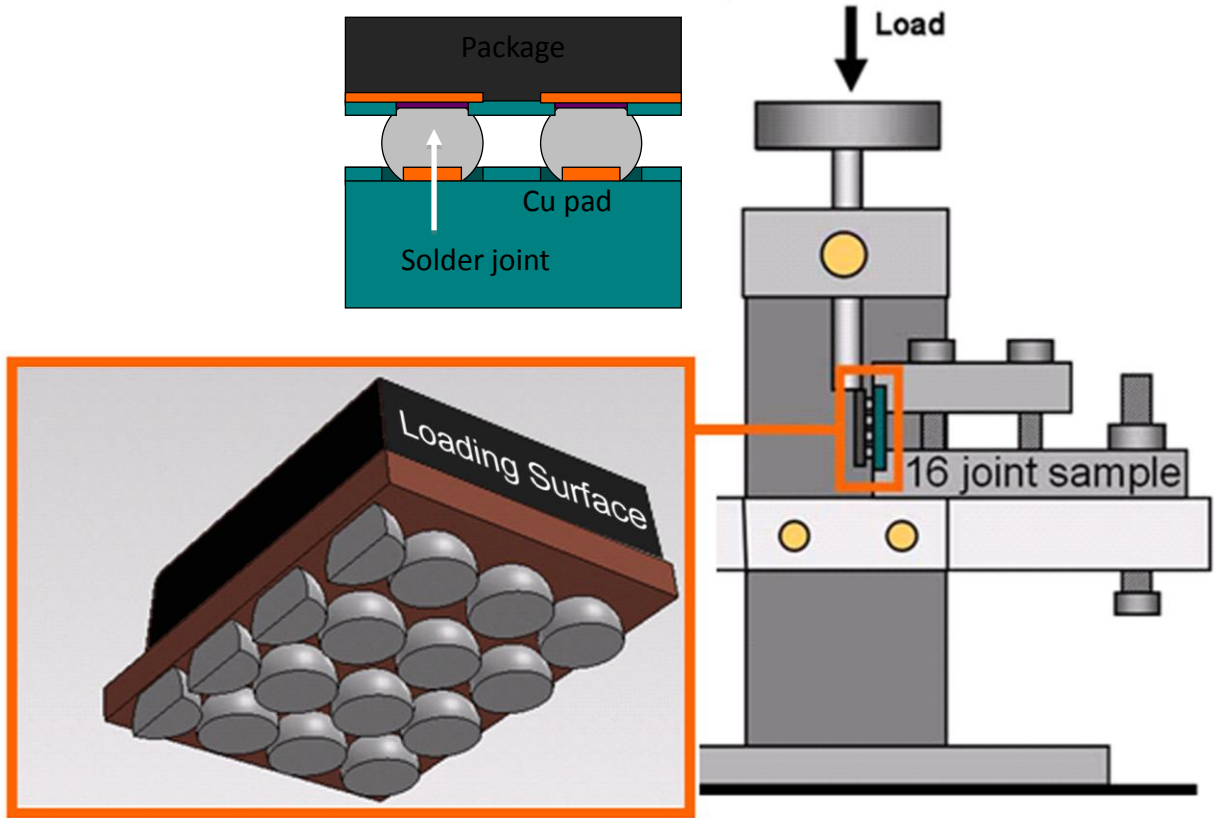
Schematic diagrams of a 4×4 solder joint array sectioned from a PBGA package. The solder ball assembly geometry and shear test apparatus is also shown.
